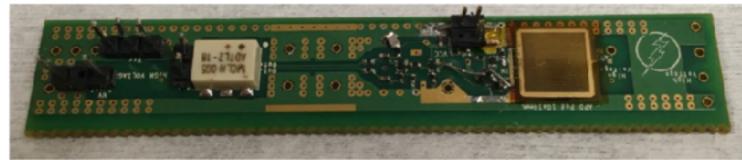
A photograph of a 1st generation PCB with a mounted mesh APD seen on the right-hand side of th PCB.
